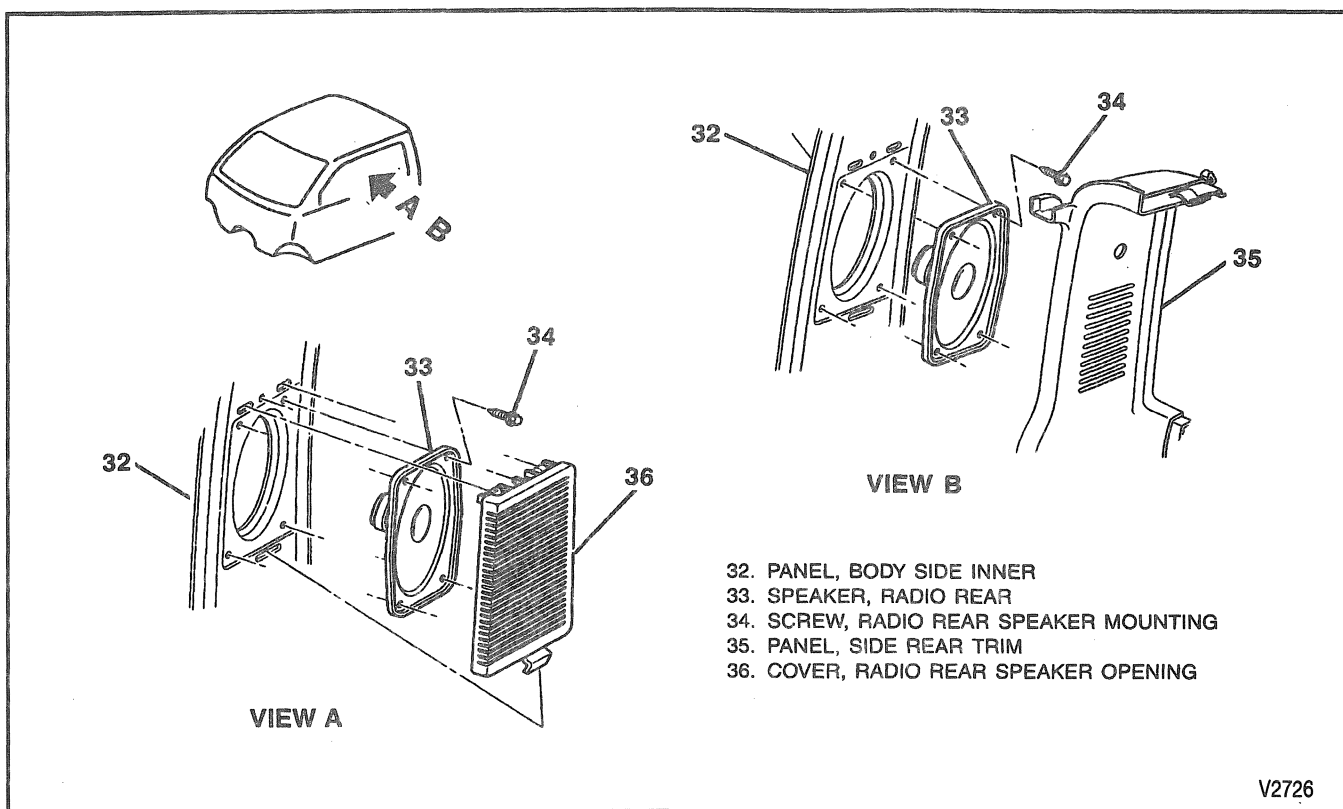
Rear Speaker Assembly (Pickup/Chassis-Cab Models)
